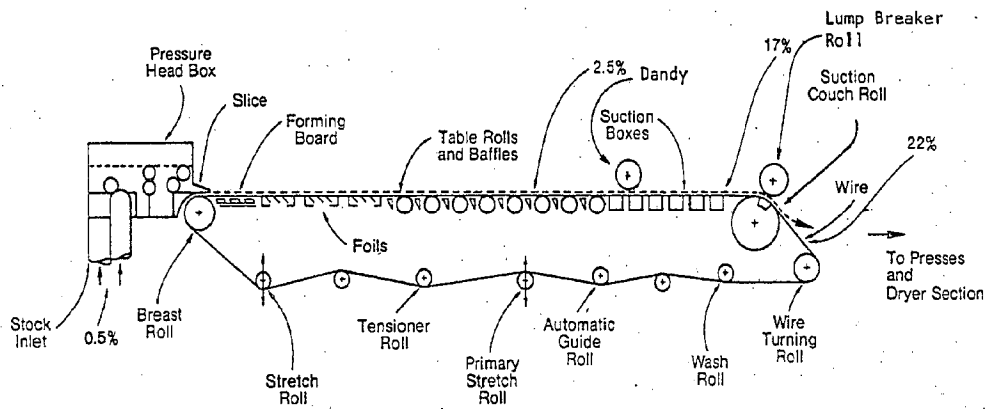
(b) A typical sketch of wet end formation equipment (Fourdrinier Machine)
